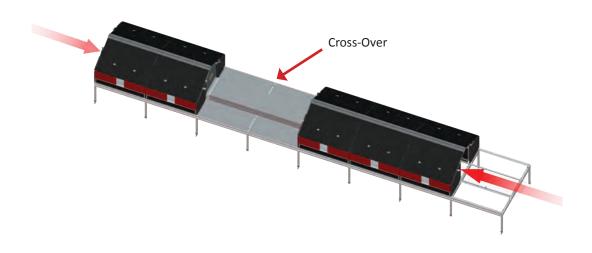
NEST ASSEMBLY FROM EXPELLER DRIVE UNIT
